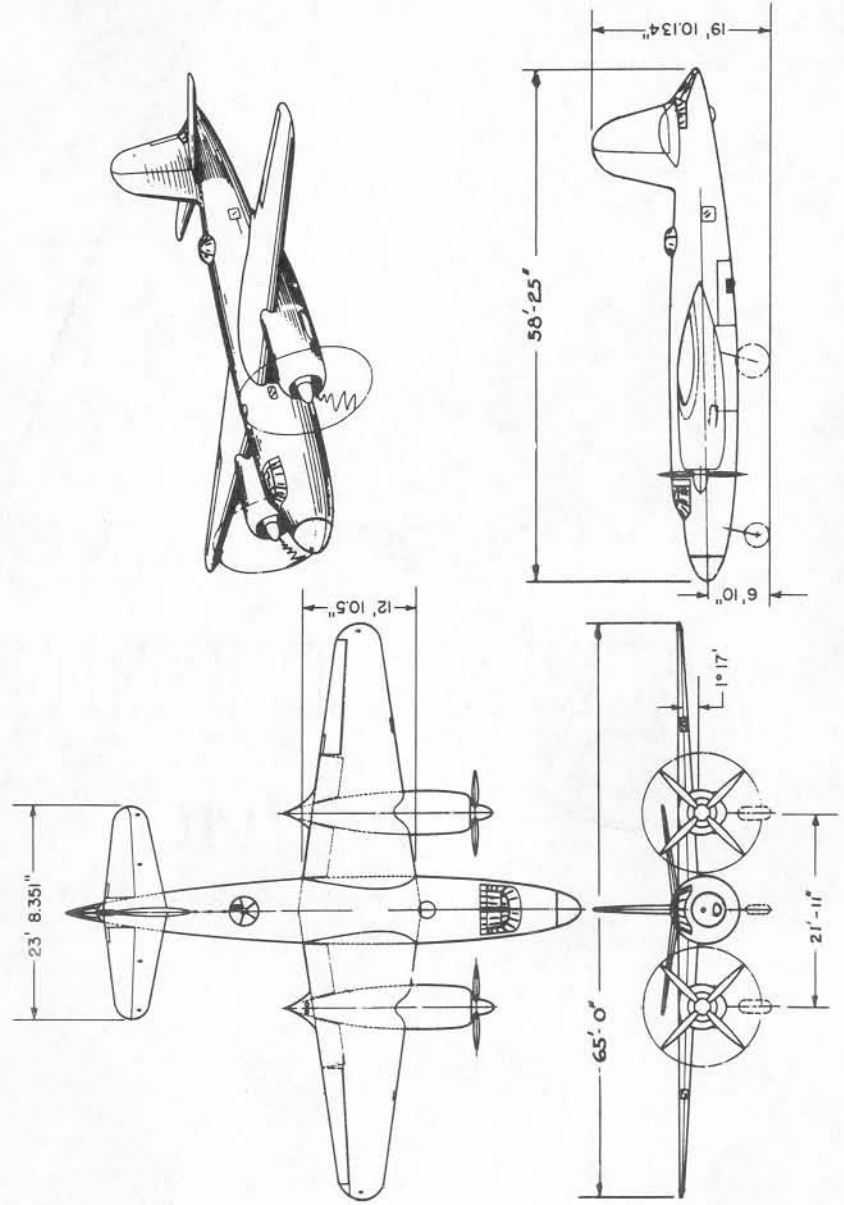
GENERAL ASSEMBLY - 3 VIEW
